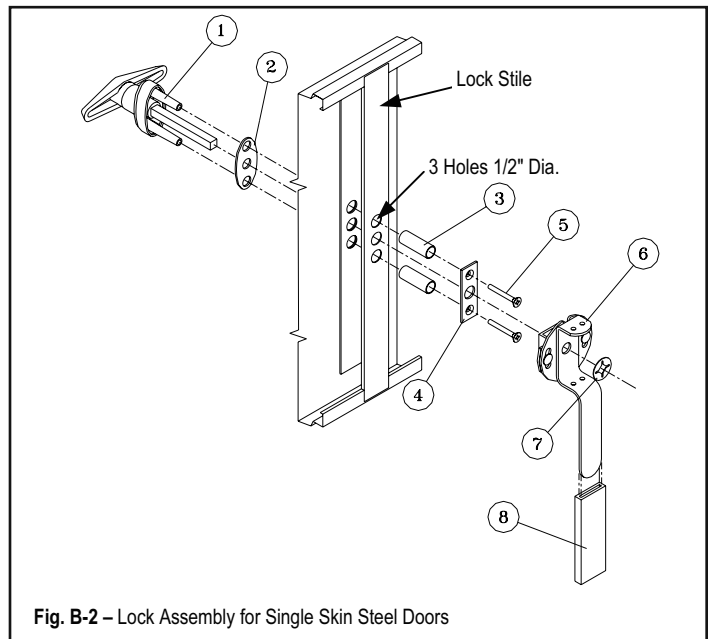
Lock Assembly for Single Skin Steel Doors
